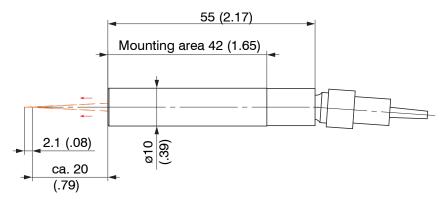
Dimensional drawing of IMP-DS19 distance sensor
